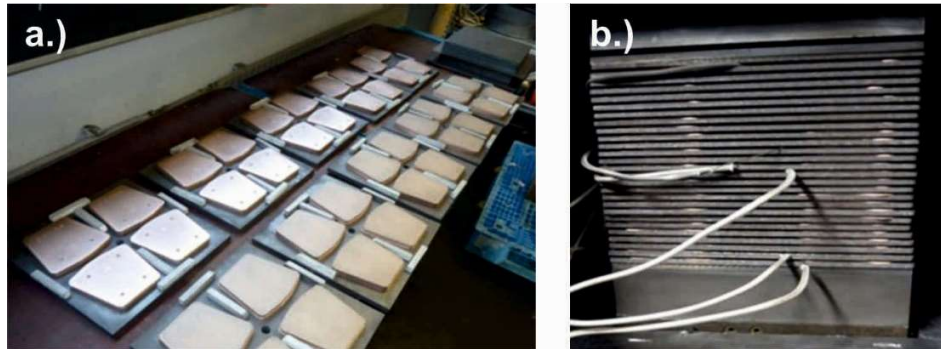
a.) Brake pad samples b.) Sintering of 500 clutch buttons in a stack configuration (Courtesy of Dr. Fritsch GmbH).
